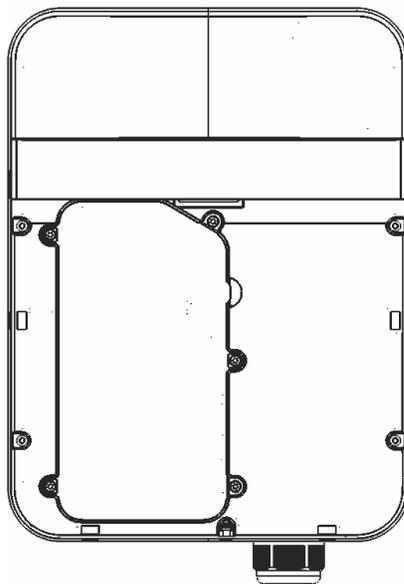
Loosen 5 pcs M4 Screw Then Open Install Cover
